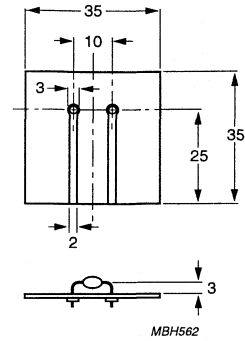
Leaded device mounted on printed-circuit board 35 × 35 mm.
